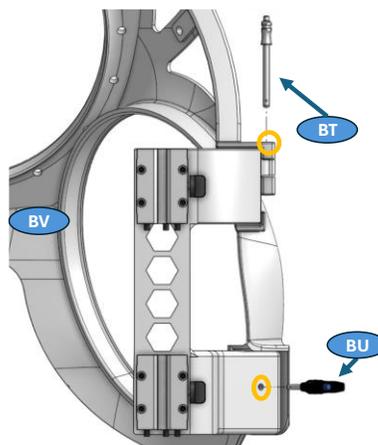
Mounting the HUT to the Carriage Rail Strut Assembly via Pip-Pins.
